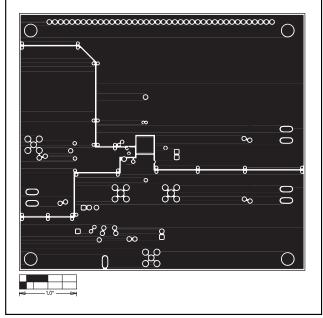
MAX5888 EV Kit PC Board Layout—Power Planes
